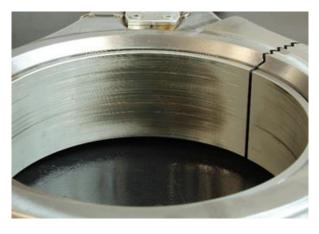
Big end bearing (Miba 3H) inspection after max. BMEP tests -
